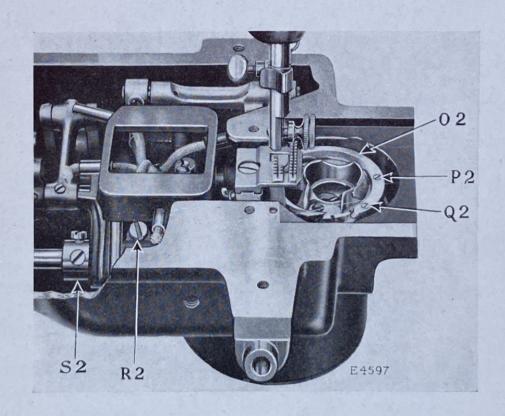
View of Machine, Showing Rotating Hook Section (O2)
